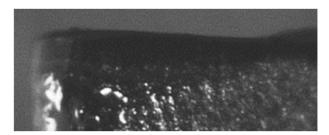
Final tool wear, WPP20S, 80 m·min⁻¹
